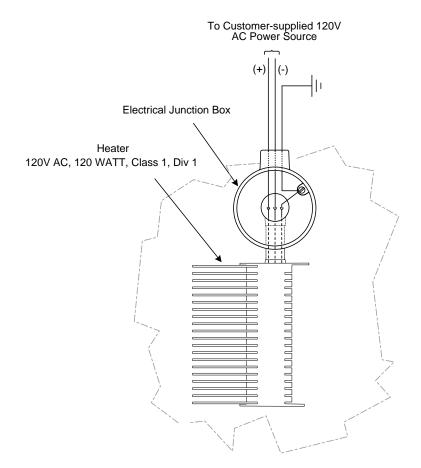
ENC82S Electric Heater Option Wiring Instructions
